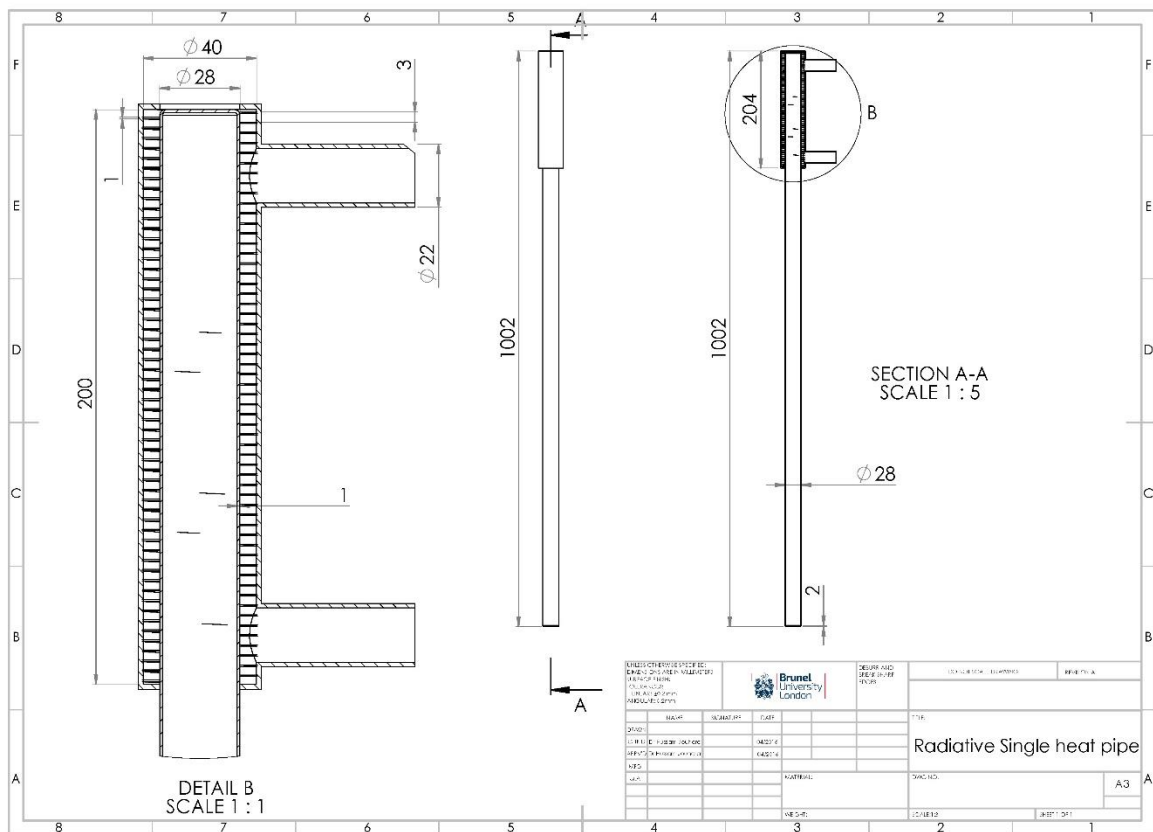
Mechanical design and dimensions of the single heat pipe
